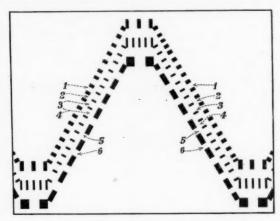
TOLERANCE CHART (Greatly Reduced)
